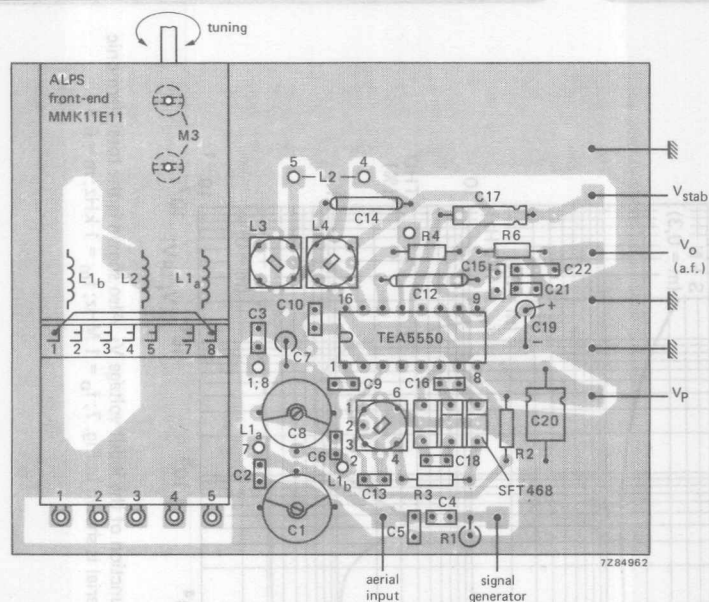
Printed-circuit board component side, showing component layout. For circuit diagram see Fig. 7.
